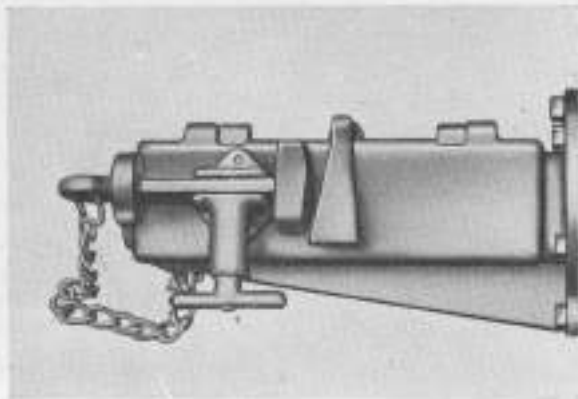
Trailer Brake Cable Connector Box with Retaining Catch Parked in Carrier.
